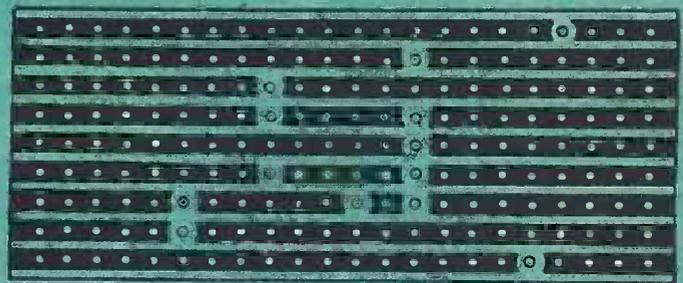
This is the foil pattern of the Veroboard. The breaks shown in the copper tracks should be made using a sharp-pointed drill.
